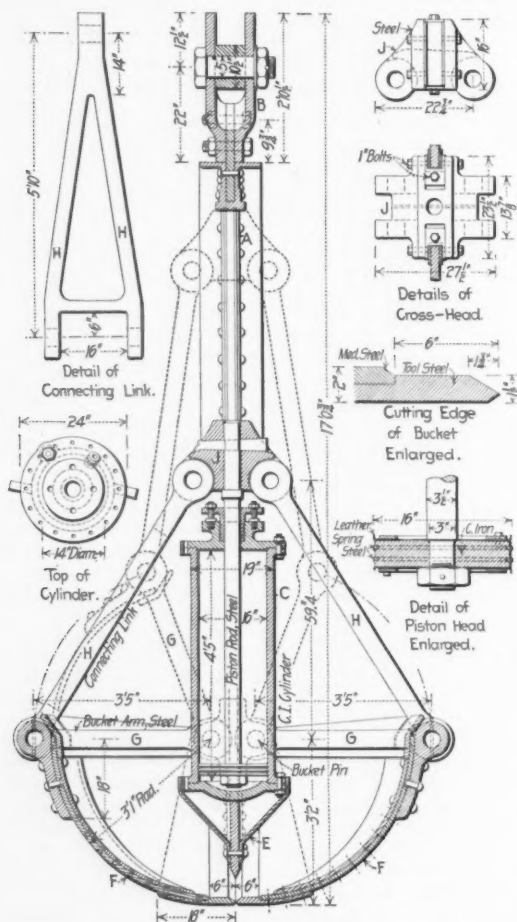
VERTICAL SECTION AND DETAILS OF PNEUMATIC CLAMSHELL DREDGE BUCKET.
